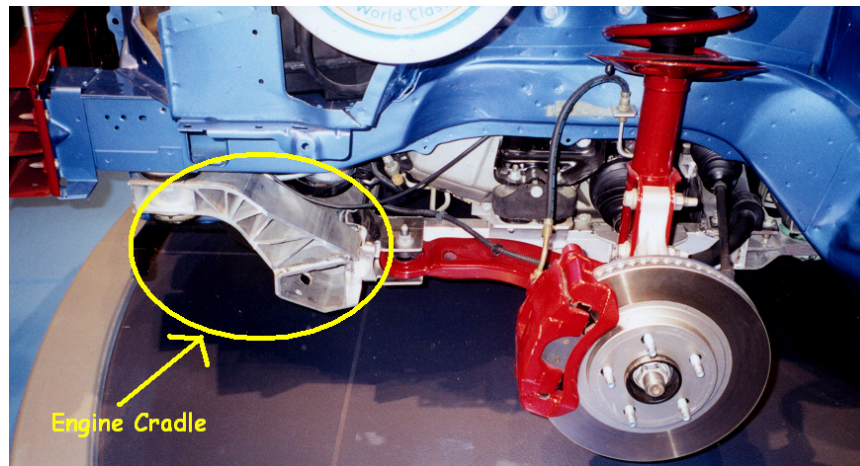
The Engine Cradle is designed to drop the engine and transmission out of the bottom of engine compartment (Cincurak 2008).
